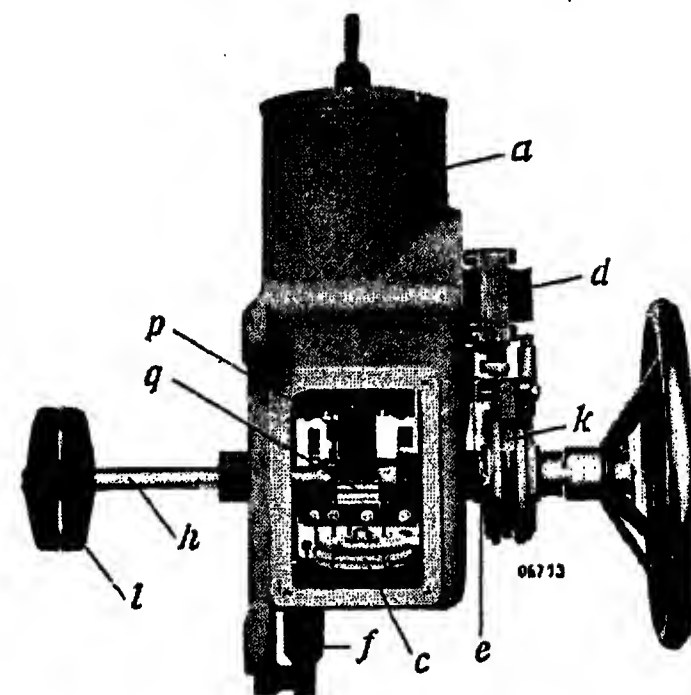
Magnet remote control, Type A, with side and protecting covers removed.
